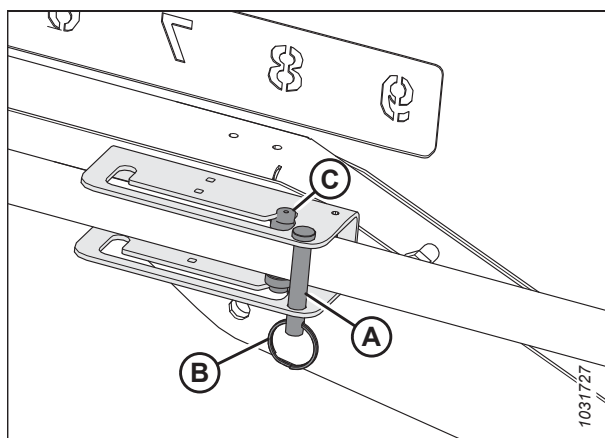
Fore-Aft Cylinder Adjustment Type 2 – Aft Position
